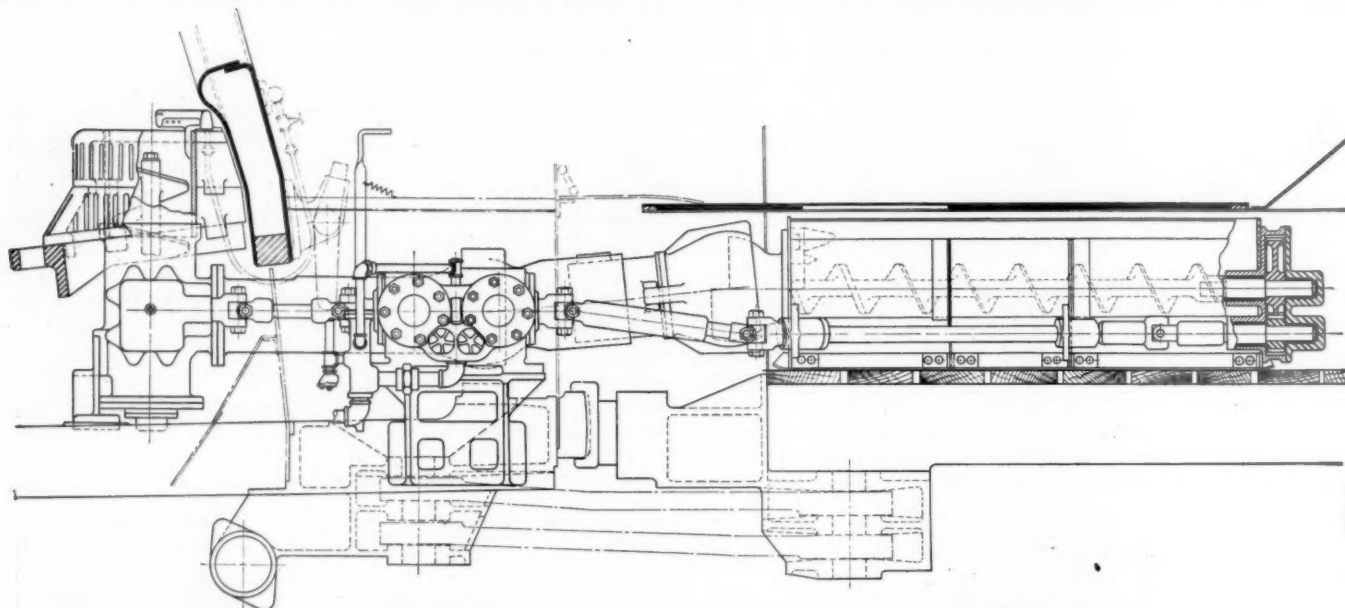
Side Elevation Drawing Showing Arrangement of Parts on the Locomotive
